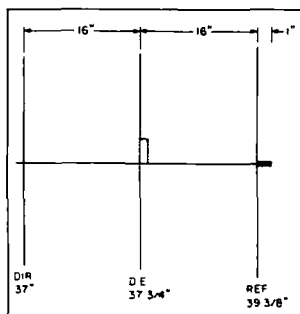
Dimensions for 3-element Yagi designed for portable use on the 2-meter FM band.
